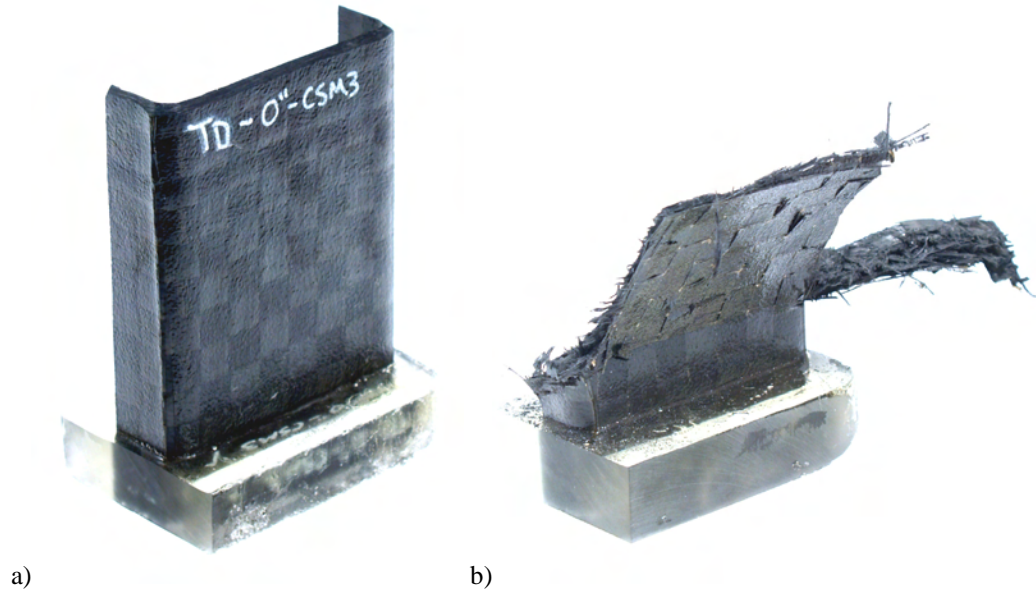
Small C-channel, specimen III, before (a) and after crush testing (b).
